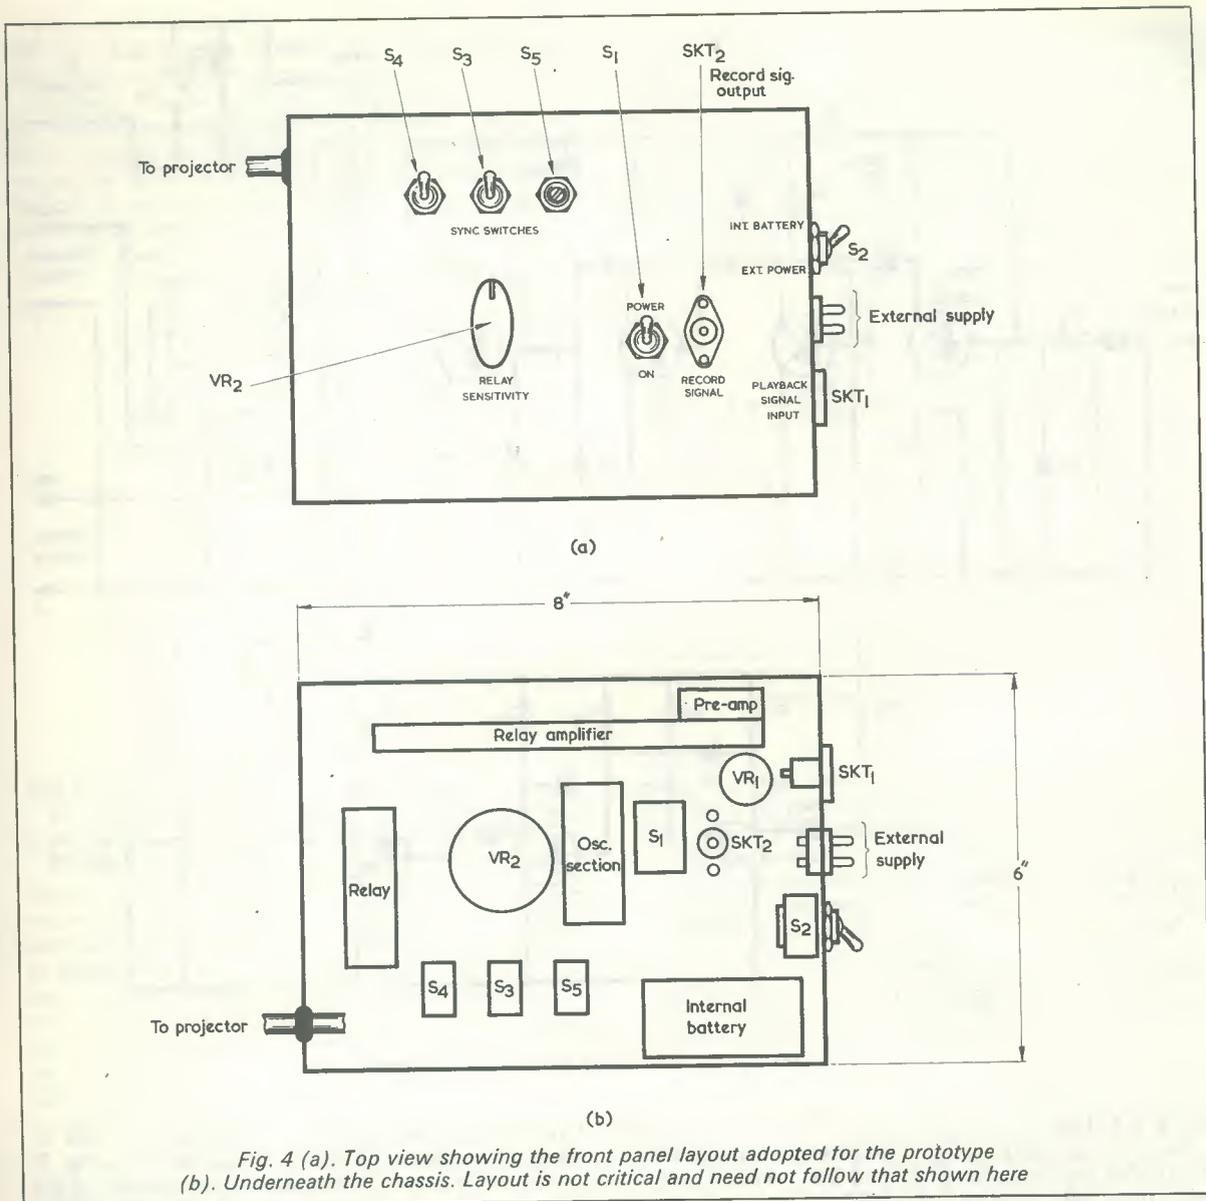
(a). Top view showing the front panel layout adopted for the prototype
